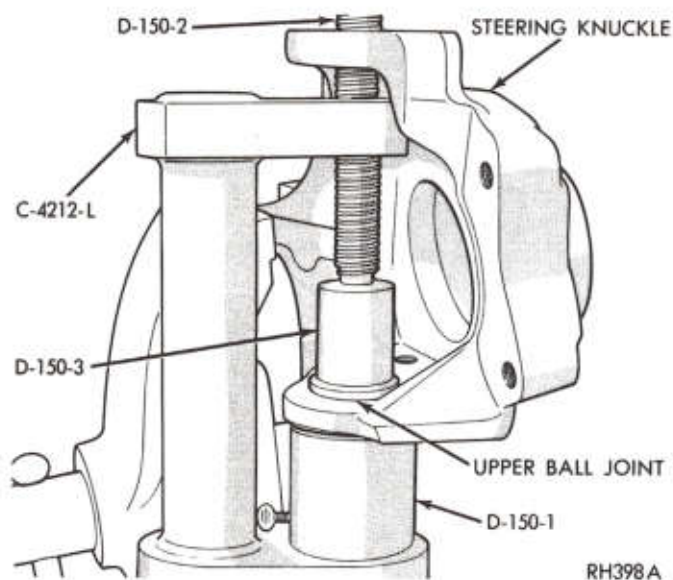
Removing Upper Ball Joint from Steering Knuckle
